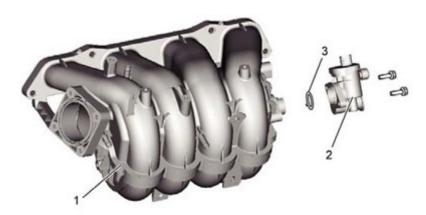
Identifying IMT Valve Actuator And Gasket Courtesy of SUZUKI OF AMERICA CORP.
